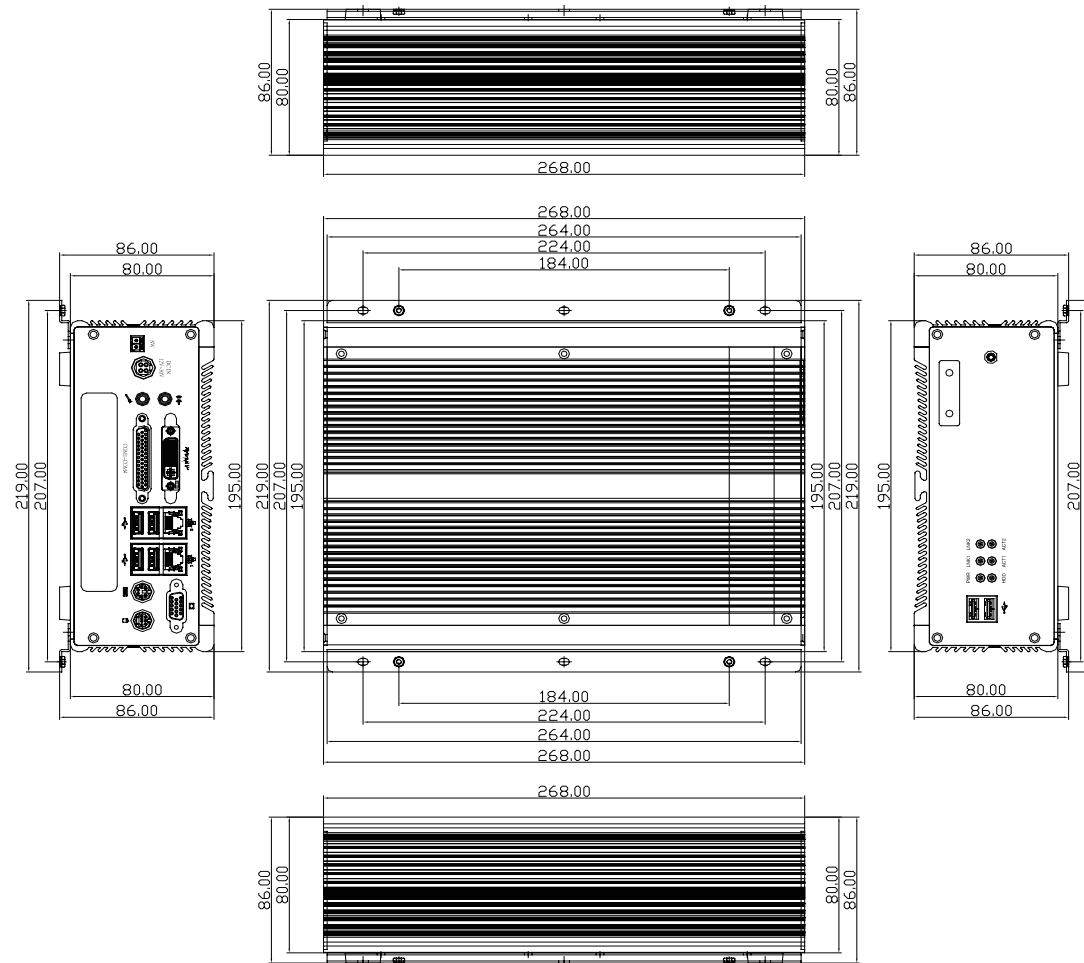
Dimension drawing of the Impact-E 42 chassis
